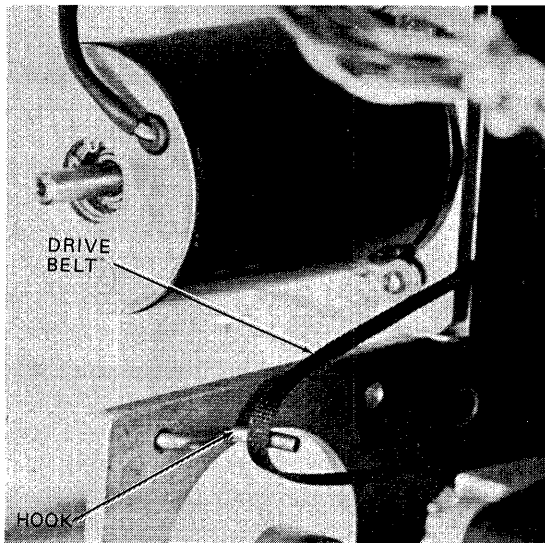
RIGHT DRIVE BELT REMOVAL
